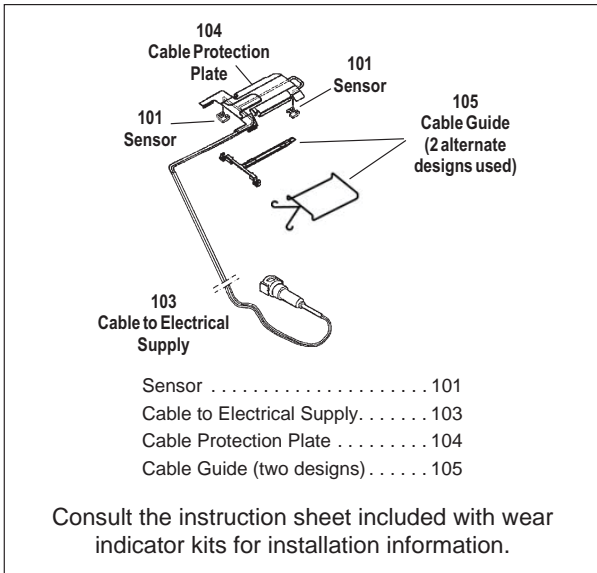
ELECTRONIC WEAR INDICATOR COMPONENTS
